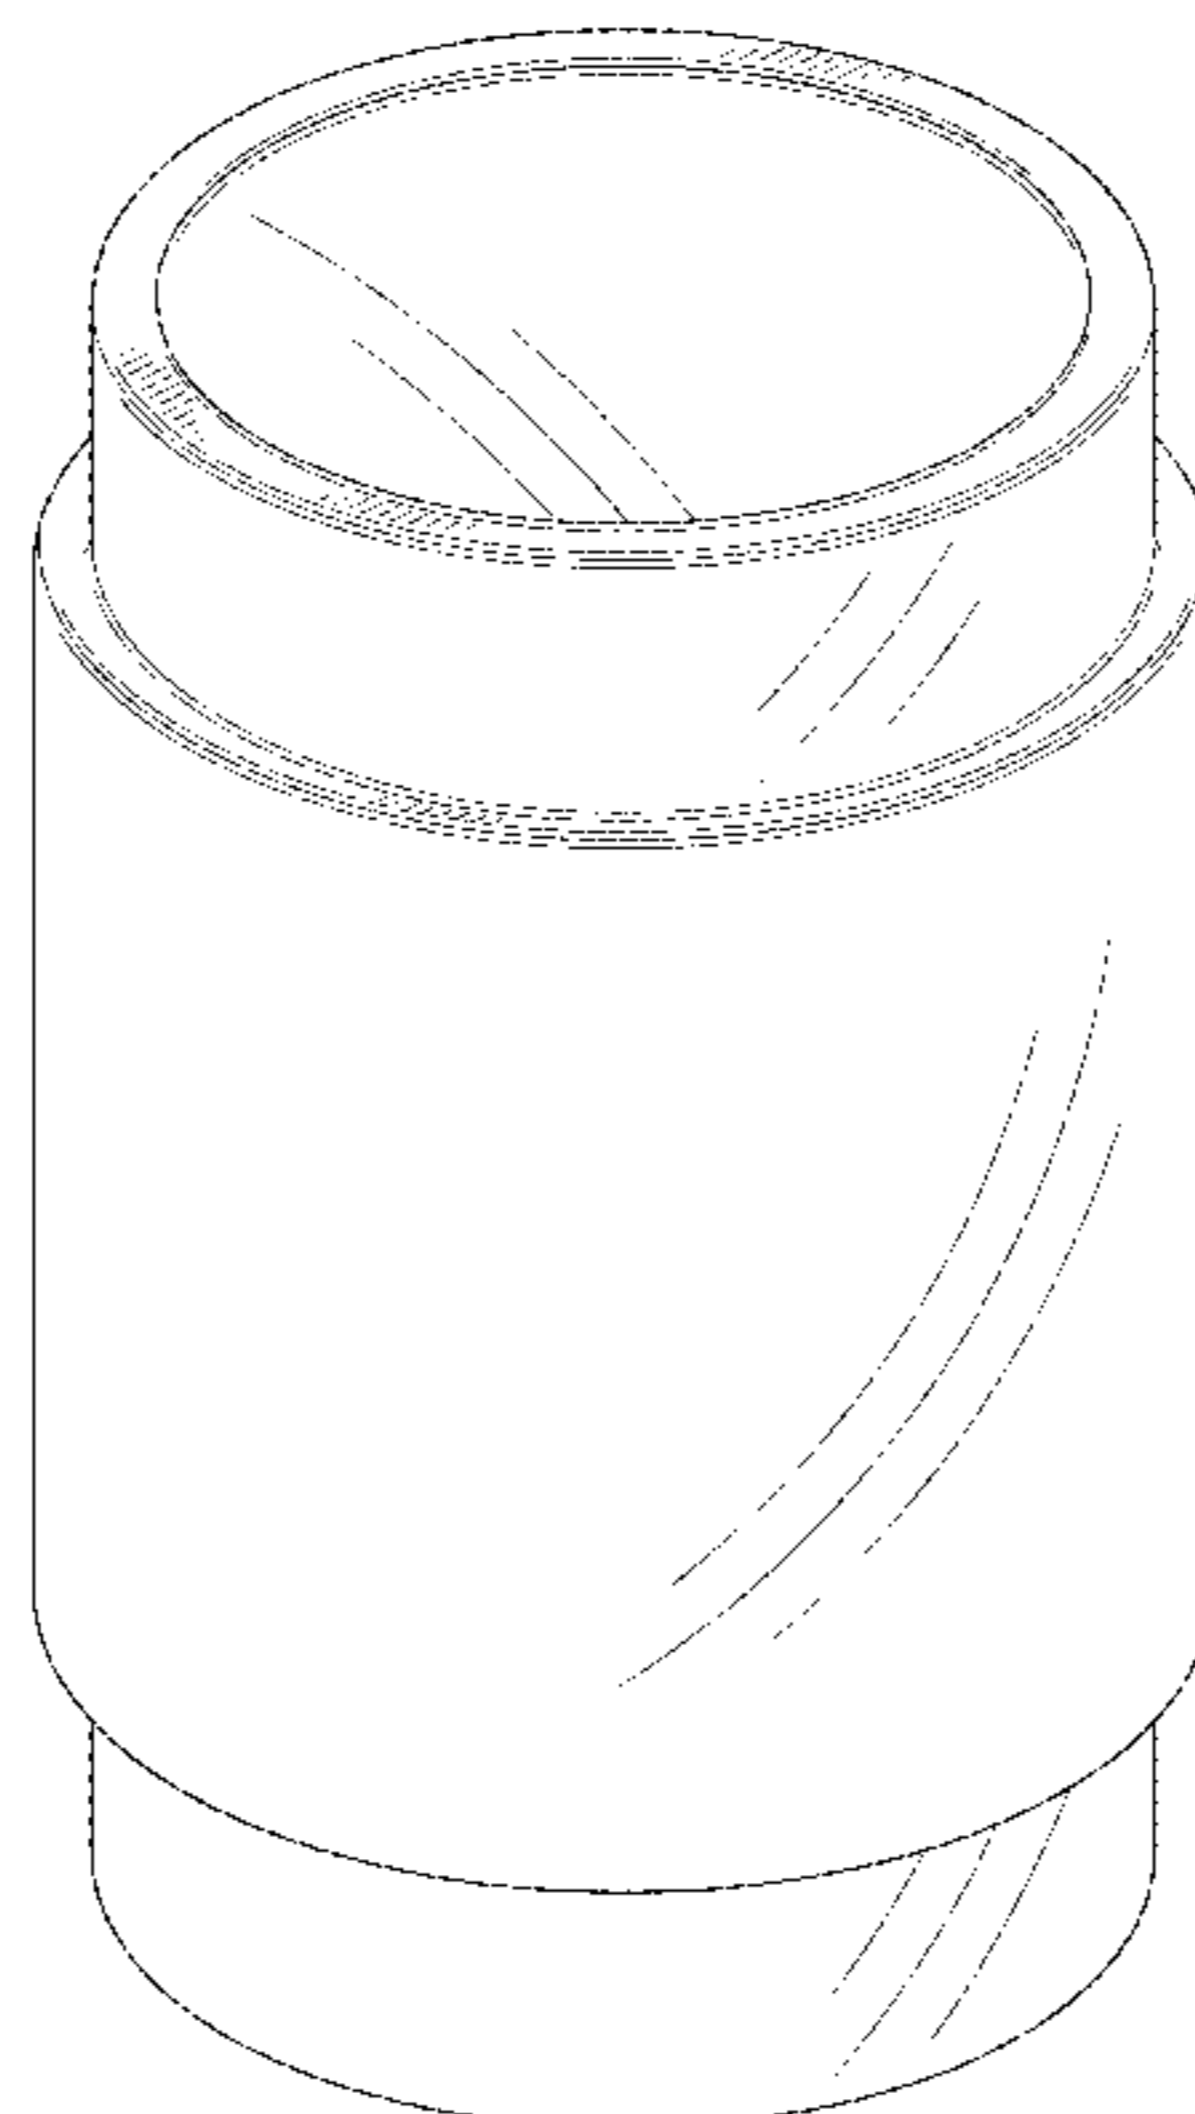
is an isometric top view of a plasma connector liner showing my new design, the isometric bottom view being identical;
